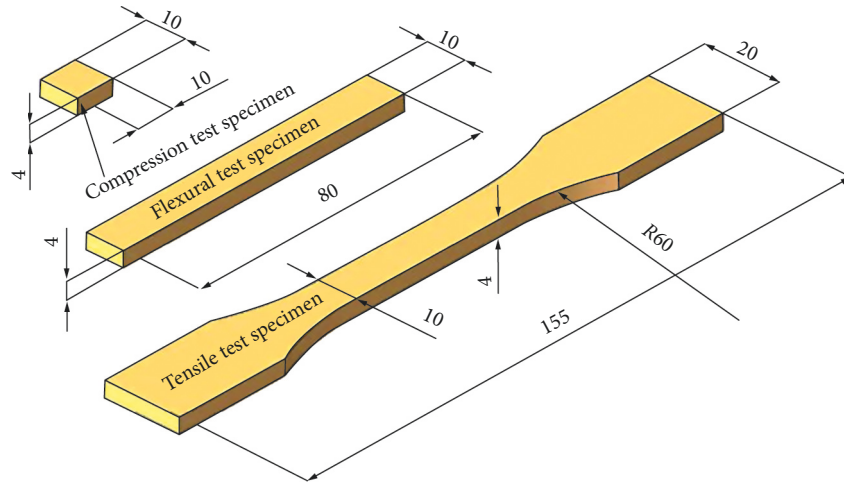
Geometry of tensile, compressive, and flexural test specimens.
